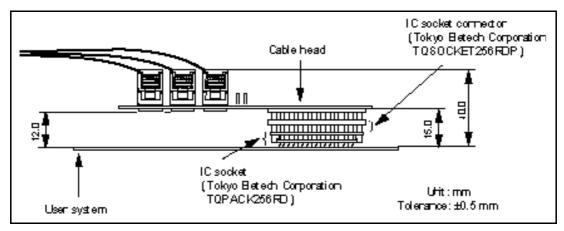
Resulting Dimensions after Connecting User System Interface Cable
